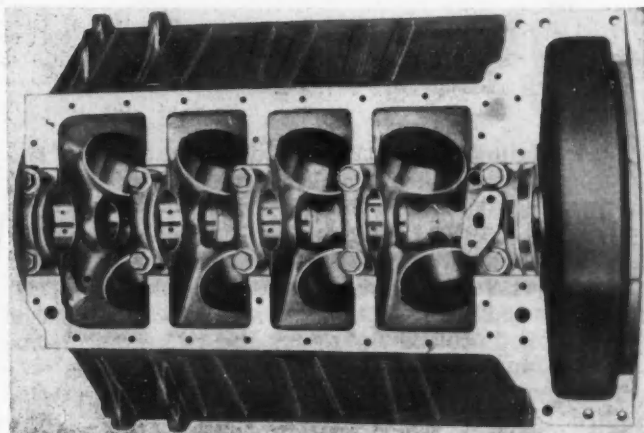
This bottom view of the crankcase indicates rigidity of the new engine design. The two blocks are joined to act as a single unit by the five transverse bulkheads
